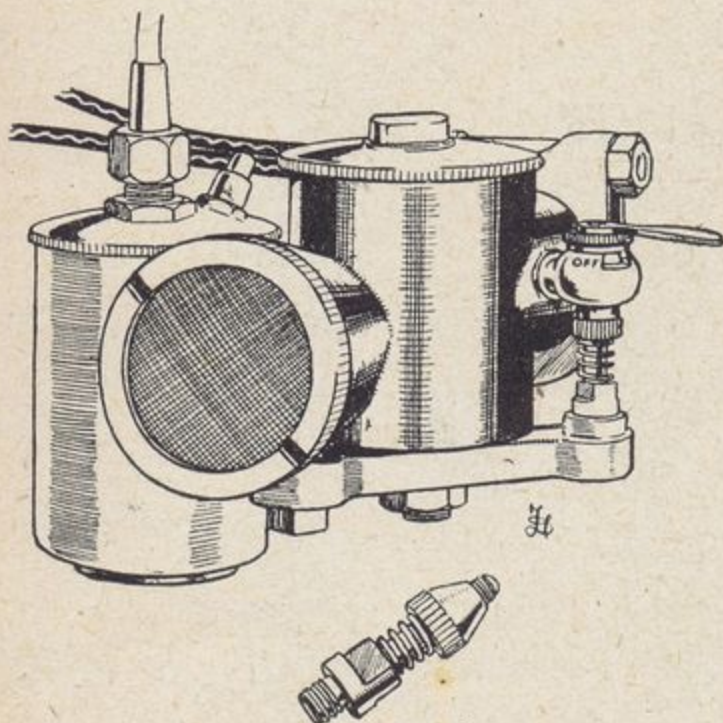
SENSPRAY CARBURETTER WITH PILOT JET ATTACHMENT. BELOW IS AN ENLARGED VIEW OF THE PILOT JET, ON WHICH SCREWS A CONE FOR AIR ADJUSTMENT.
